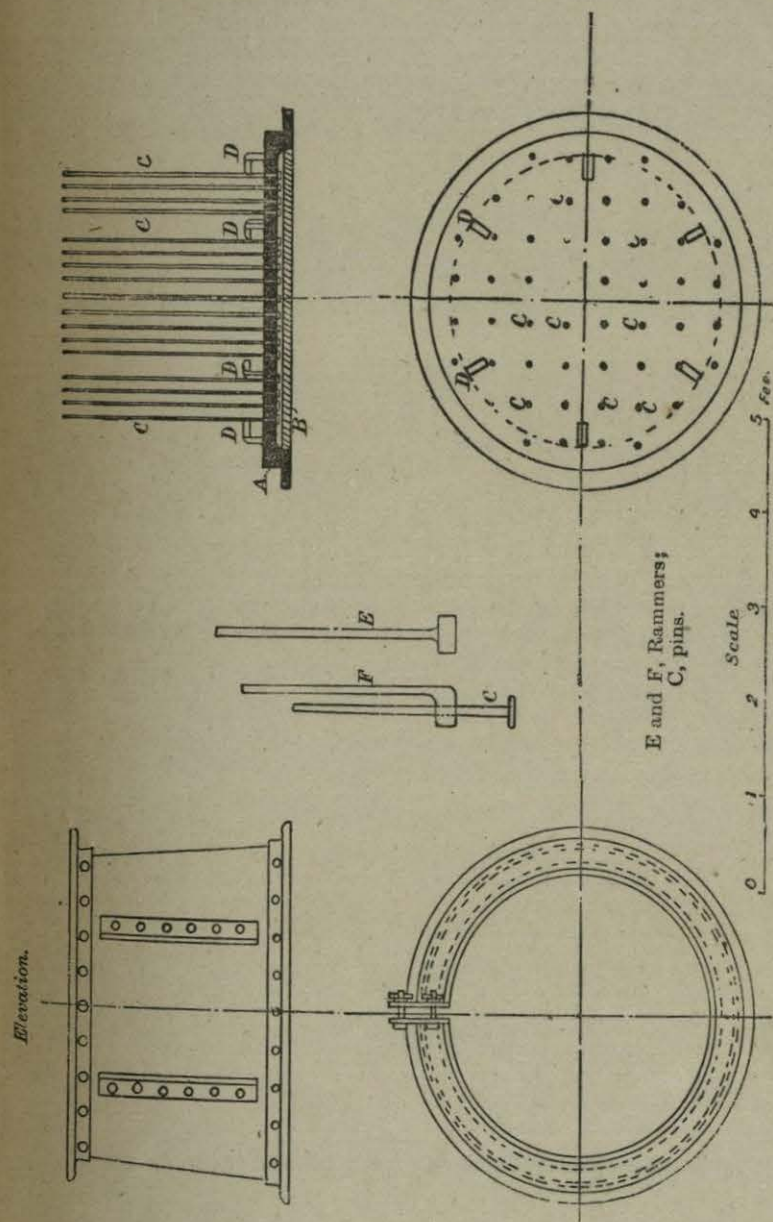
Plan and Elevation of Wrought-Iron Casing for fastening round bottom plate.
